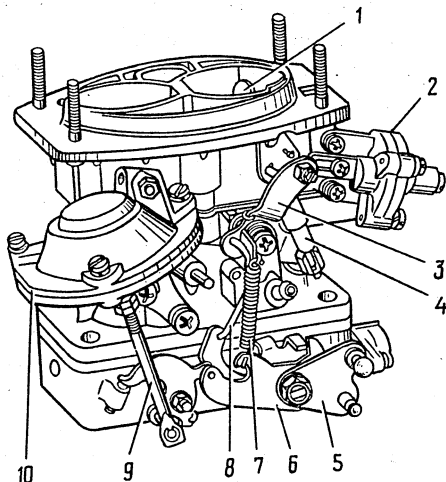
Carburettor 2107-1107010-20 Viewed from Throttle Control Linkage:
